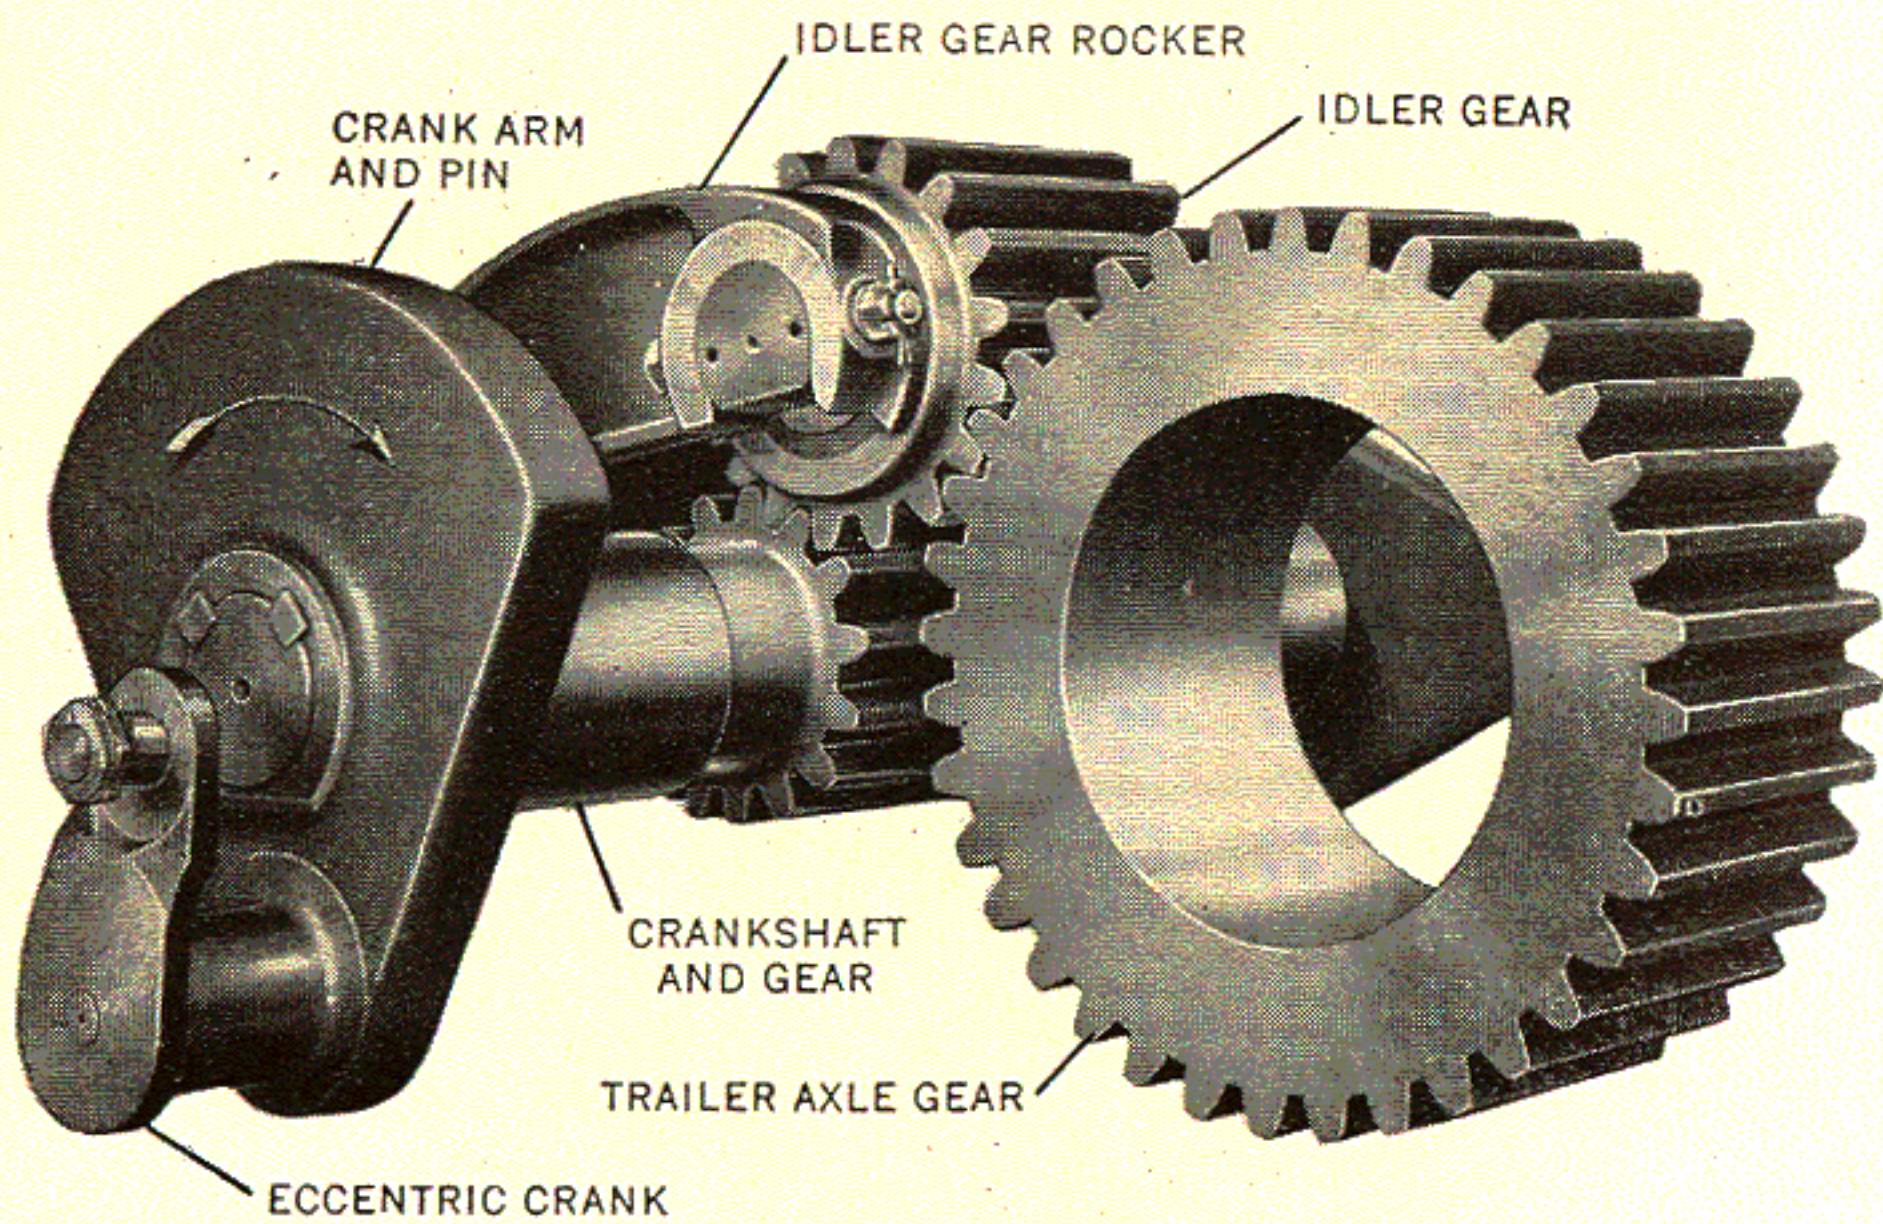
Crankshaft, Idler Gear Rocker, and Gears
